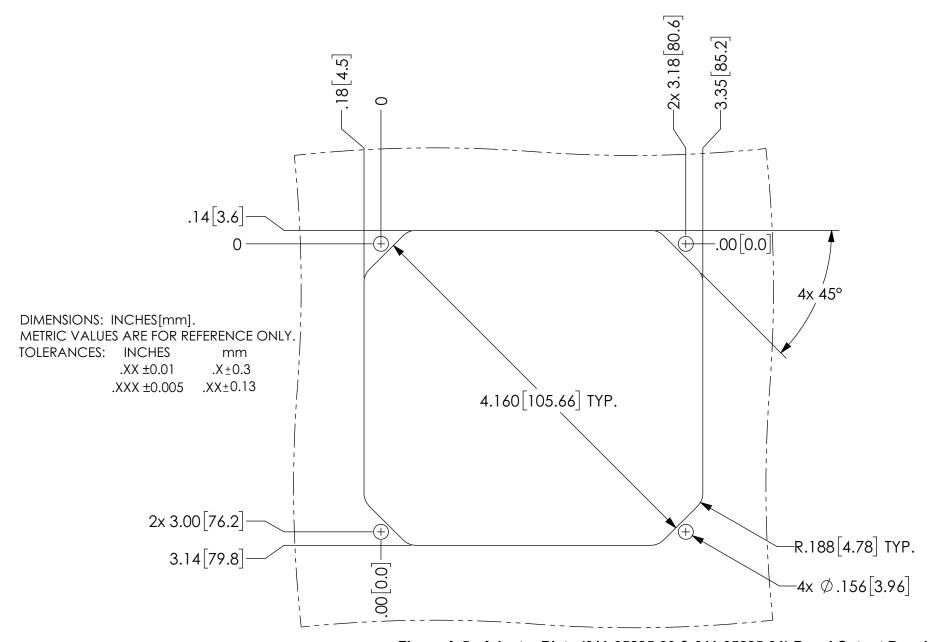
Adapter Plate (011-05285-00 & 011-05285-01) Panel Cutout Drawing
